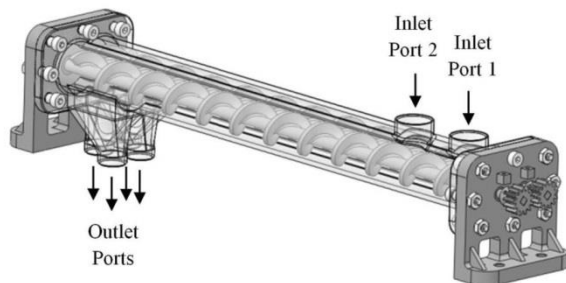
THE COLD FLOW, LABORATORY SCALE DOUBLE SCREW MIXER USED IN THESE STUDIES. ALL PARTS SHOWN ARE 3D PRINTED [18].
